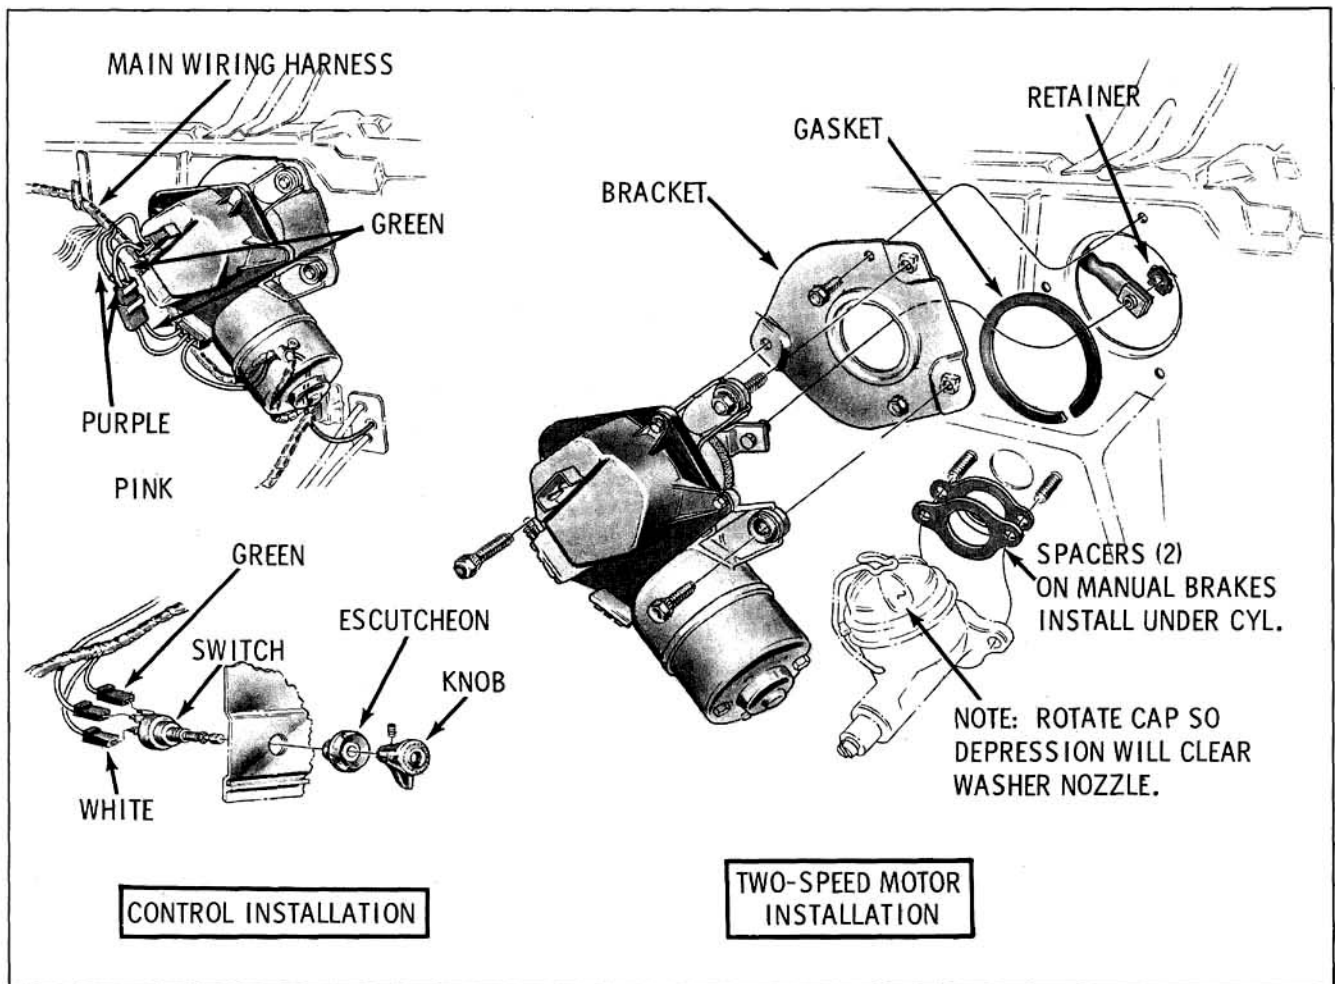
Wiper Mounting (33-34-35-36 and 3800 Series)
